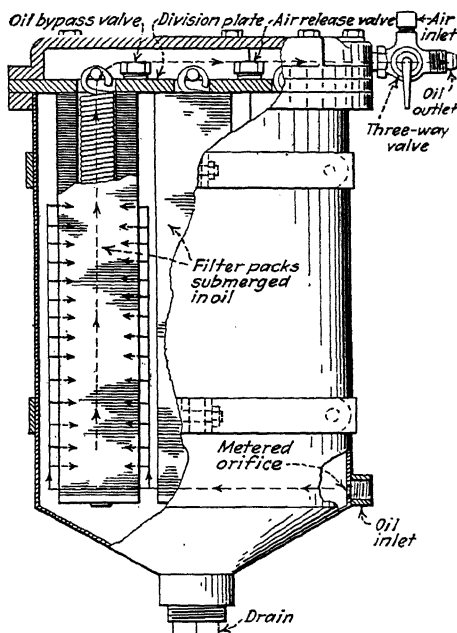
Filtering elements in this filter are comprised of stacks of special paper disks held together by helical springs.
